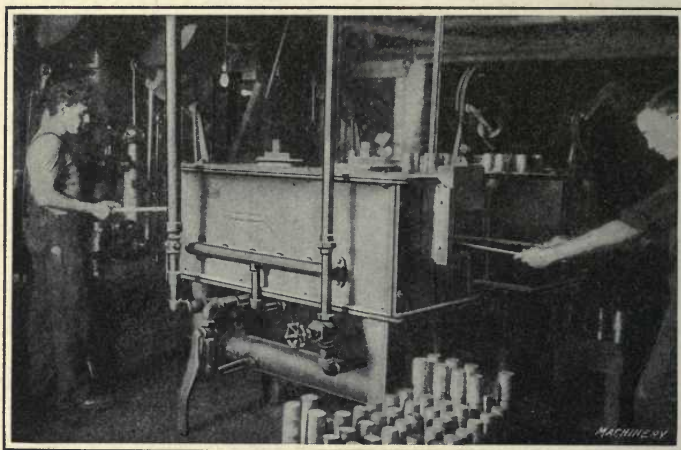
Stewart Gas Furnace used for heating Castings previous to hot-pressing
